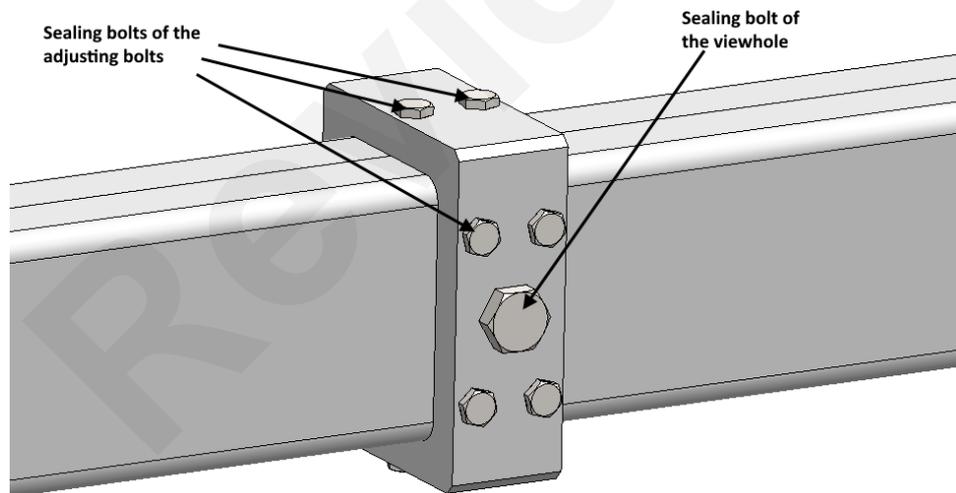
Beam connecting flange. On one side it has a view hole covered with an NBR O-ring sealed bolt.
